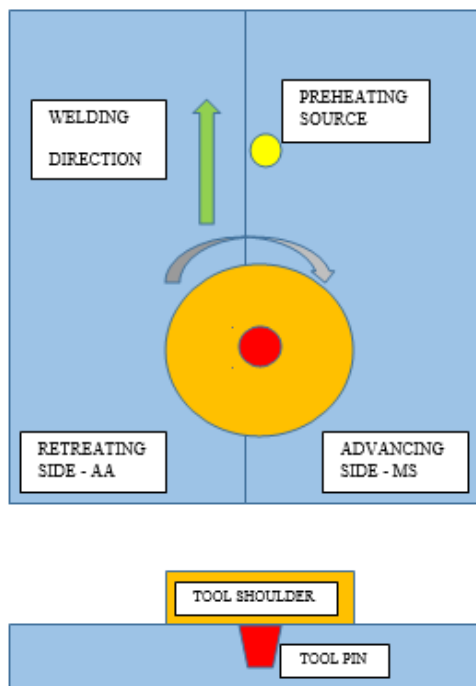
Friction Stir Welding appearance to join Dissimilar Materials
